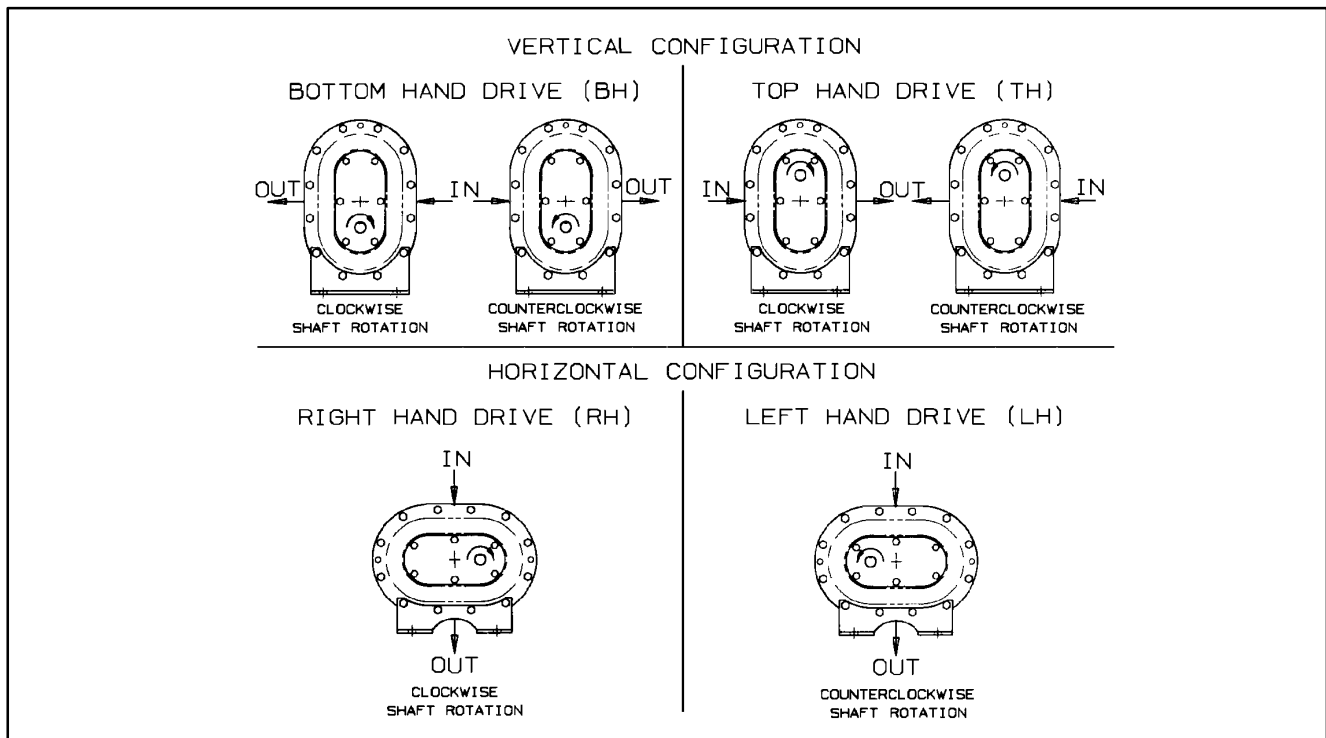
PUMP MOUNTING CONFIGURATIONS
